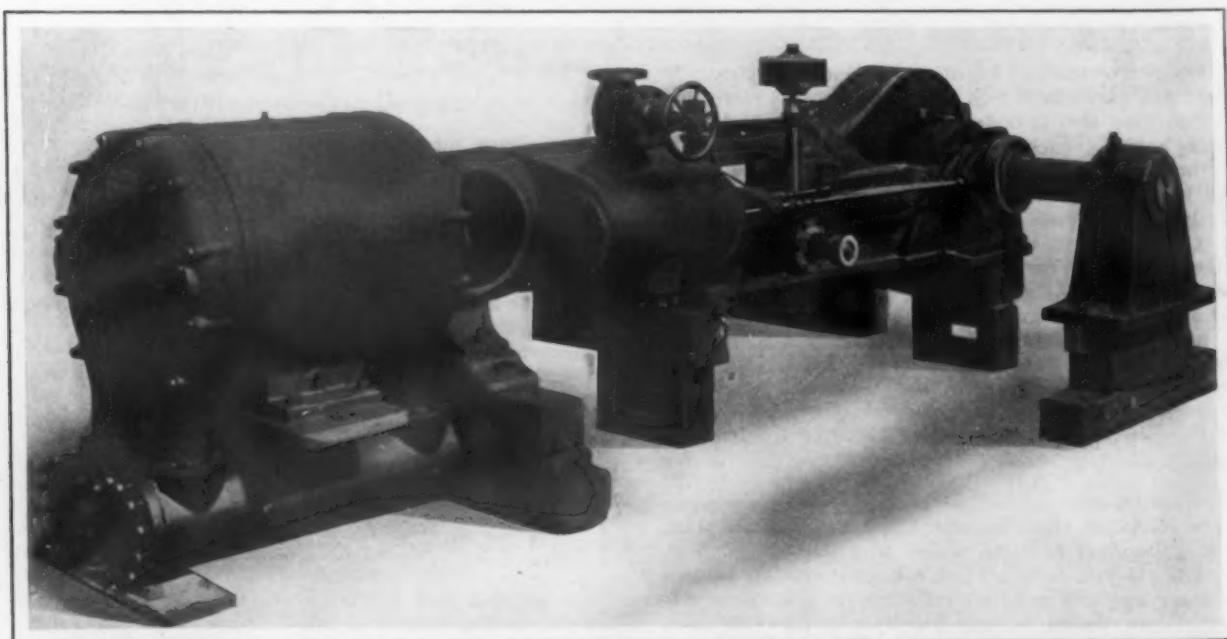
A New Type of Reciprocating Air Pump with Multi-Port Plate Views Assembled on the Builder's Erecting Floor
